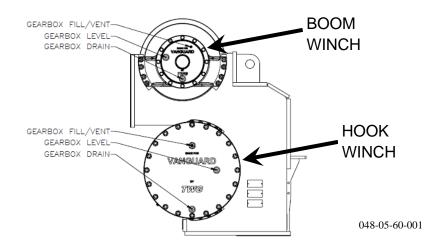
Hook Winch & Boom Winch Gearbox Oil Change Ports
